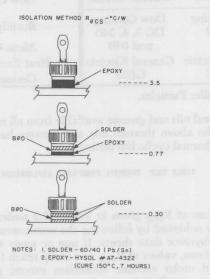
MOUNTING THE PRESS FIT PACKAGE WITH BERYLLIUM OXIDE INSULATION
